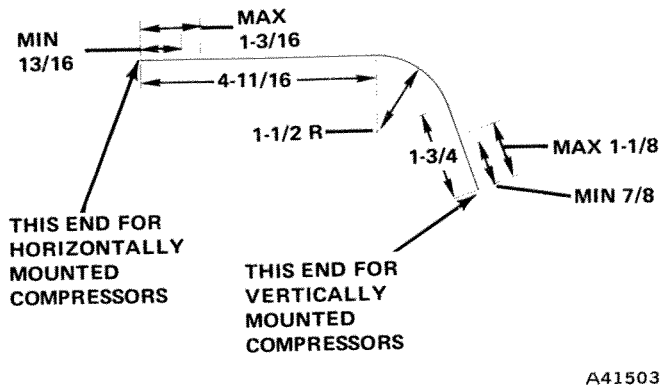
A-15 Oil Dipstick Fabrication Dimensions (Inches)
